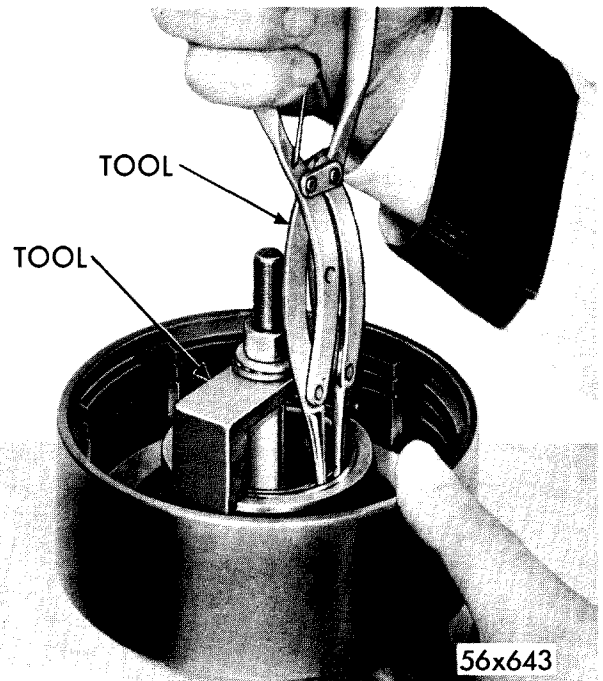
Removal and Installation of Rear Clutch Return Spring Retainer Snap Ring
